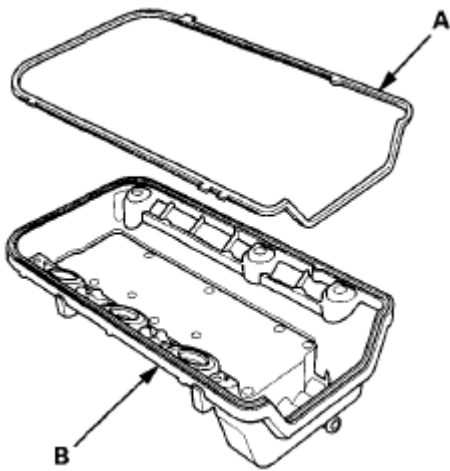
Identifying Head Cover Gasket And Cylinder Head Cover
